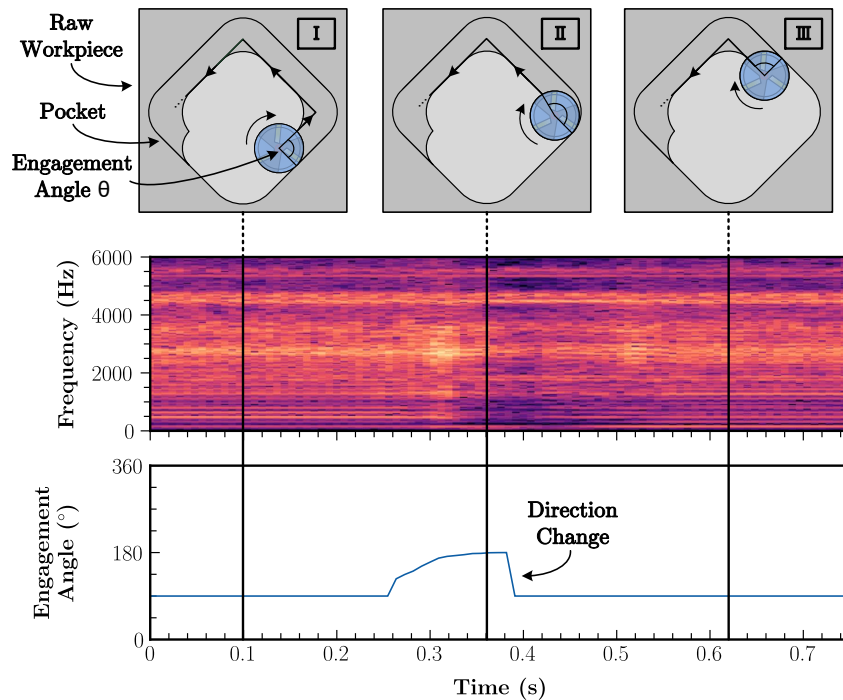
Engagement angle variation during pocket milling using the example of a square pocket geometry.
